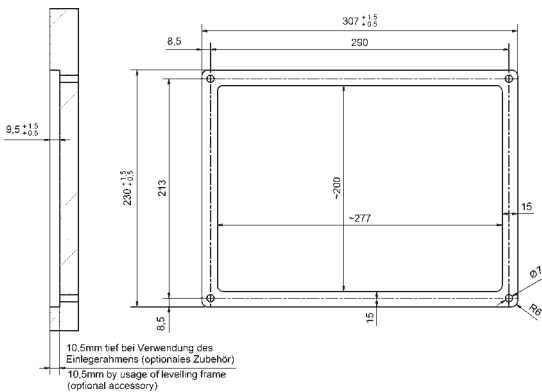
Required installation dimensions on the routing table (enlarged view page 28)
